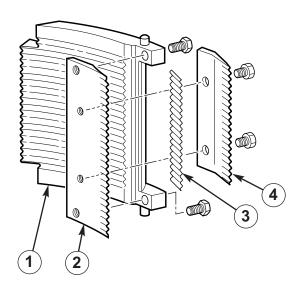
Typical shredding shoe. (1) Shoe, (2) Knife Holder, (3) Knife, (4) Knife Clamp
